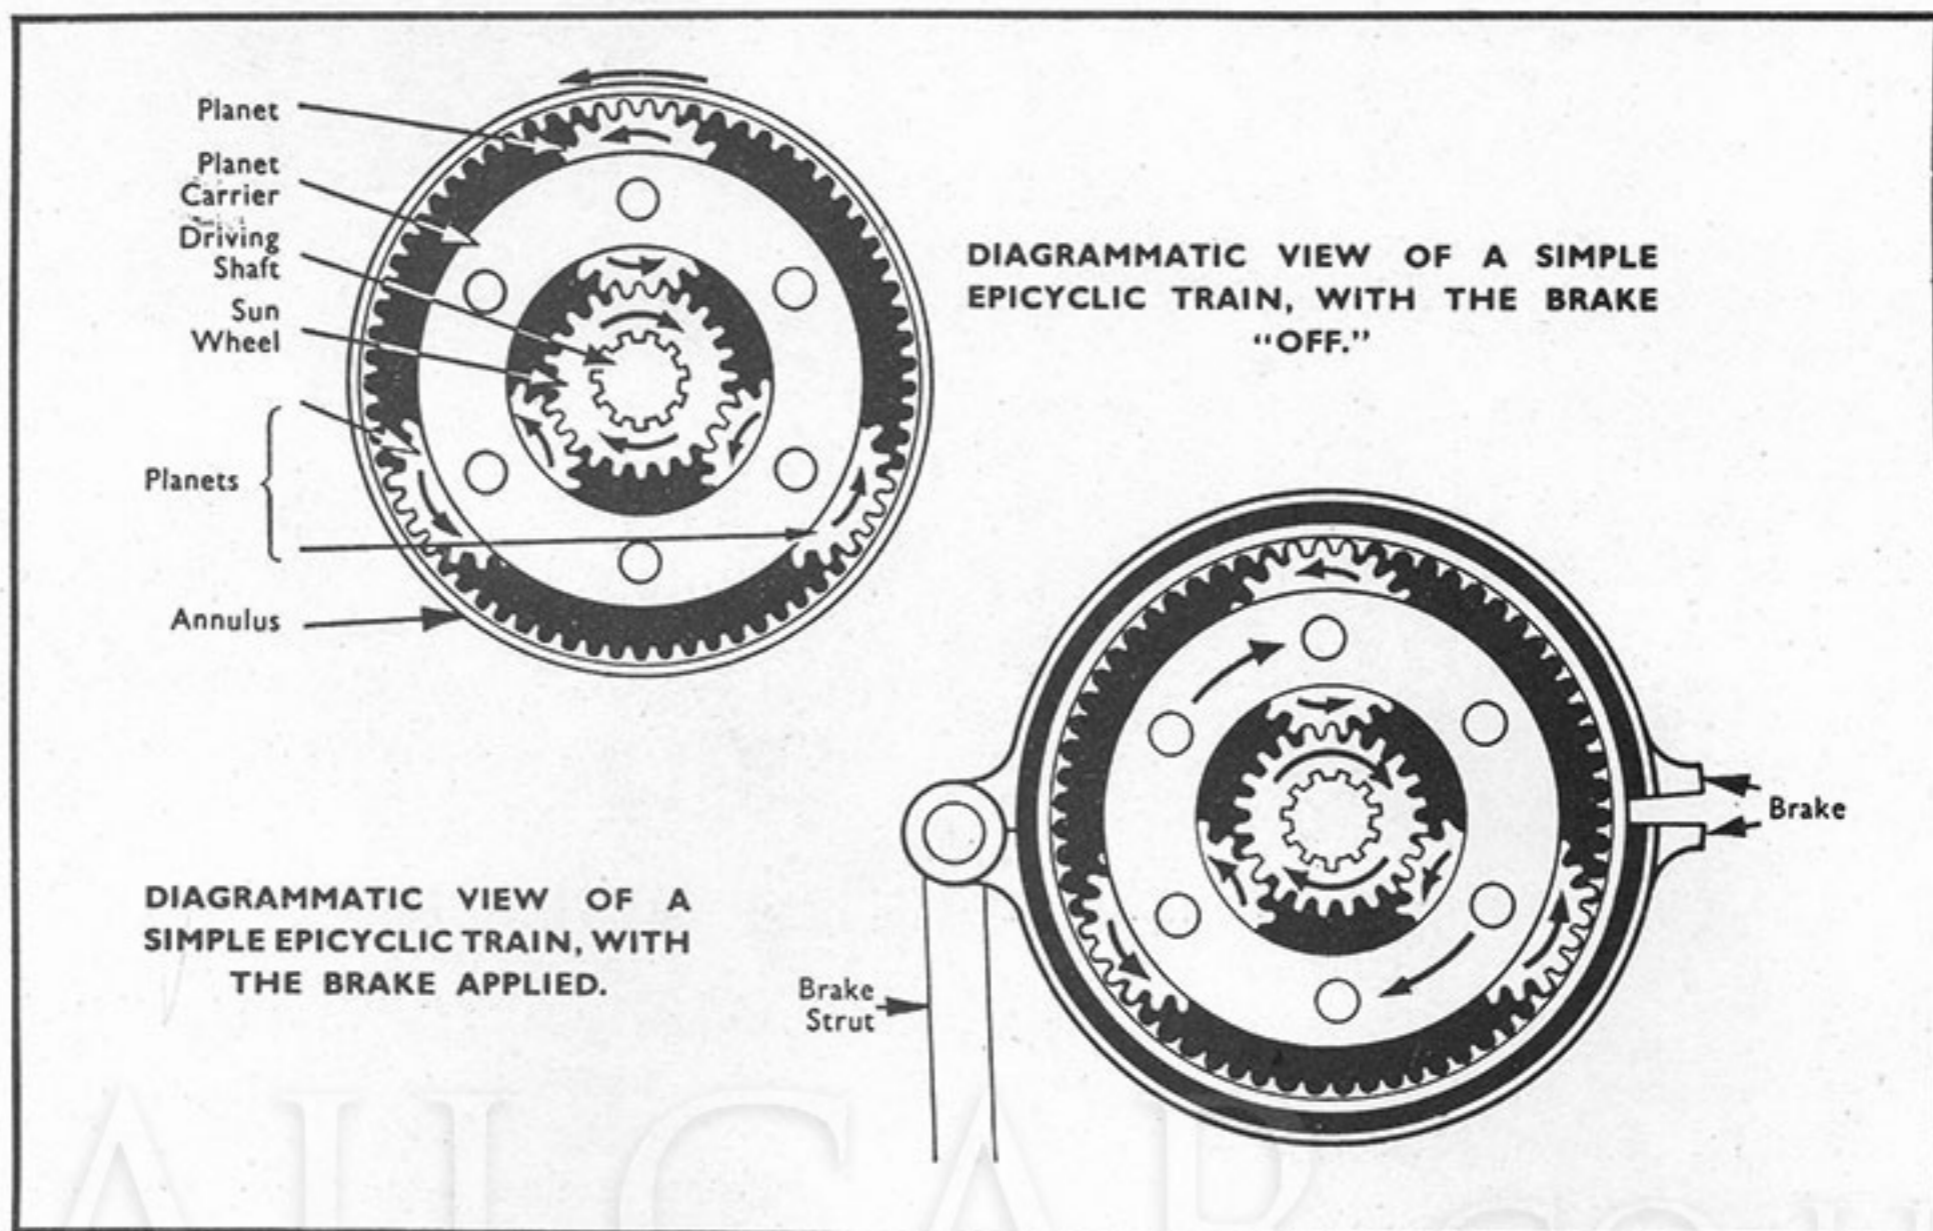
Diagrammatic View of Epicyclic Gear Train.
